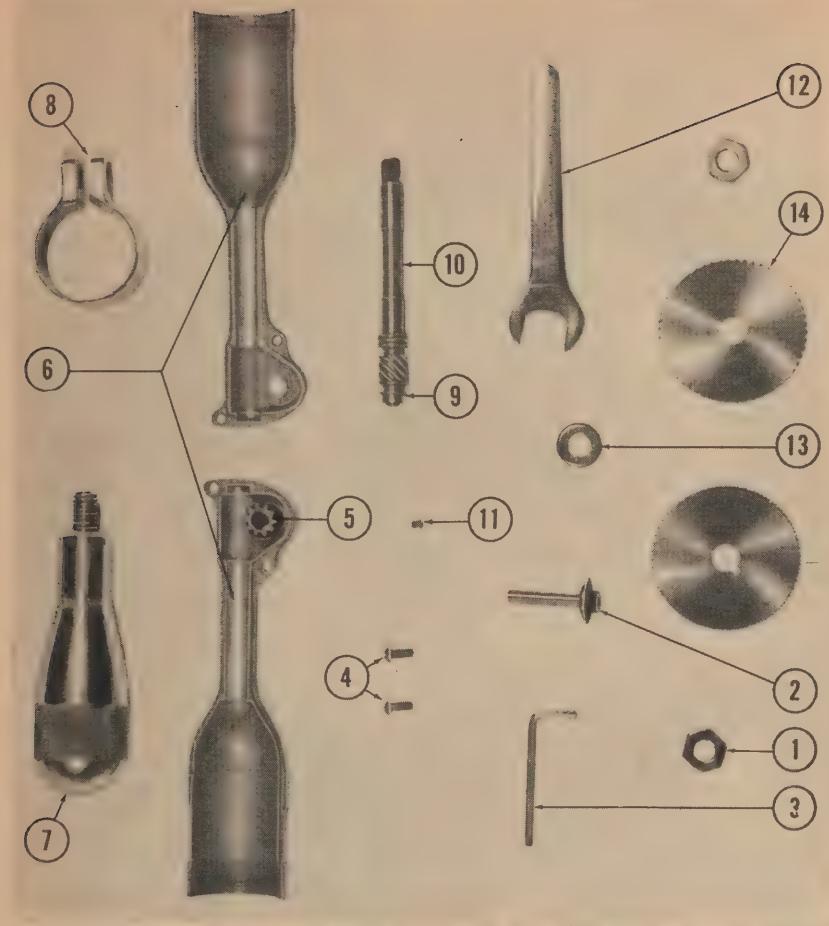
The longitudinal attachment, showing all parts and the circular saws.
